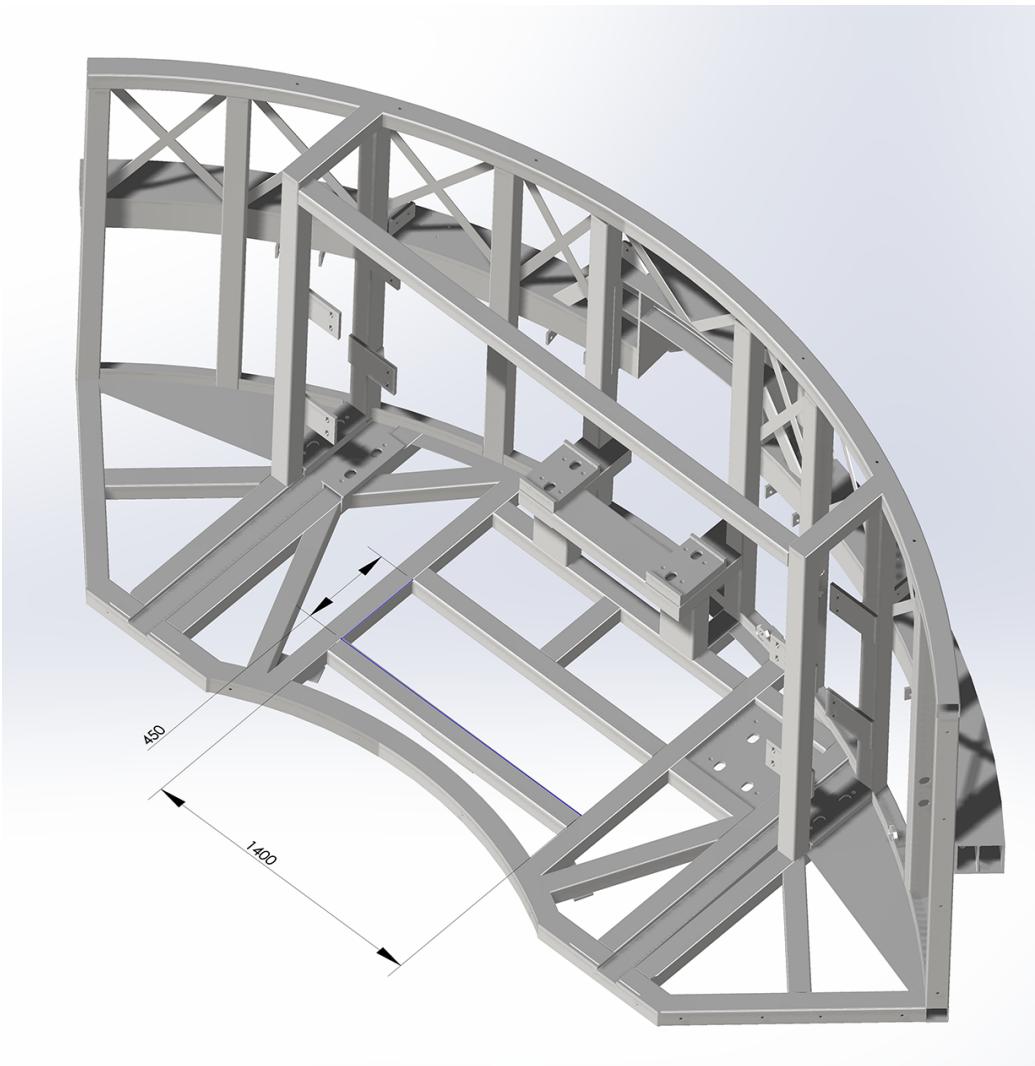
Removable floor hatch on observation floor in EOS 1.8m telescope
